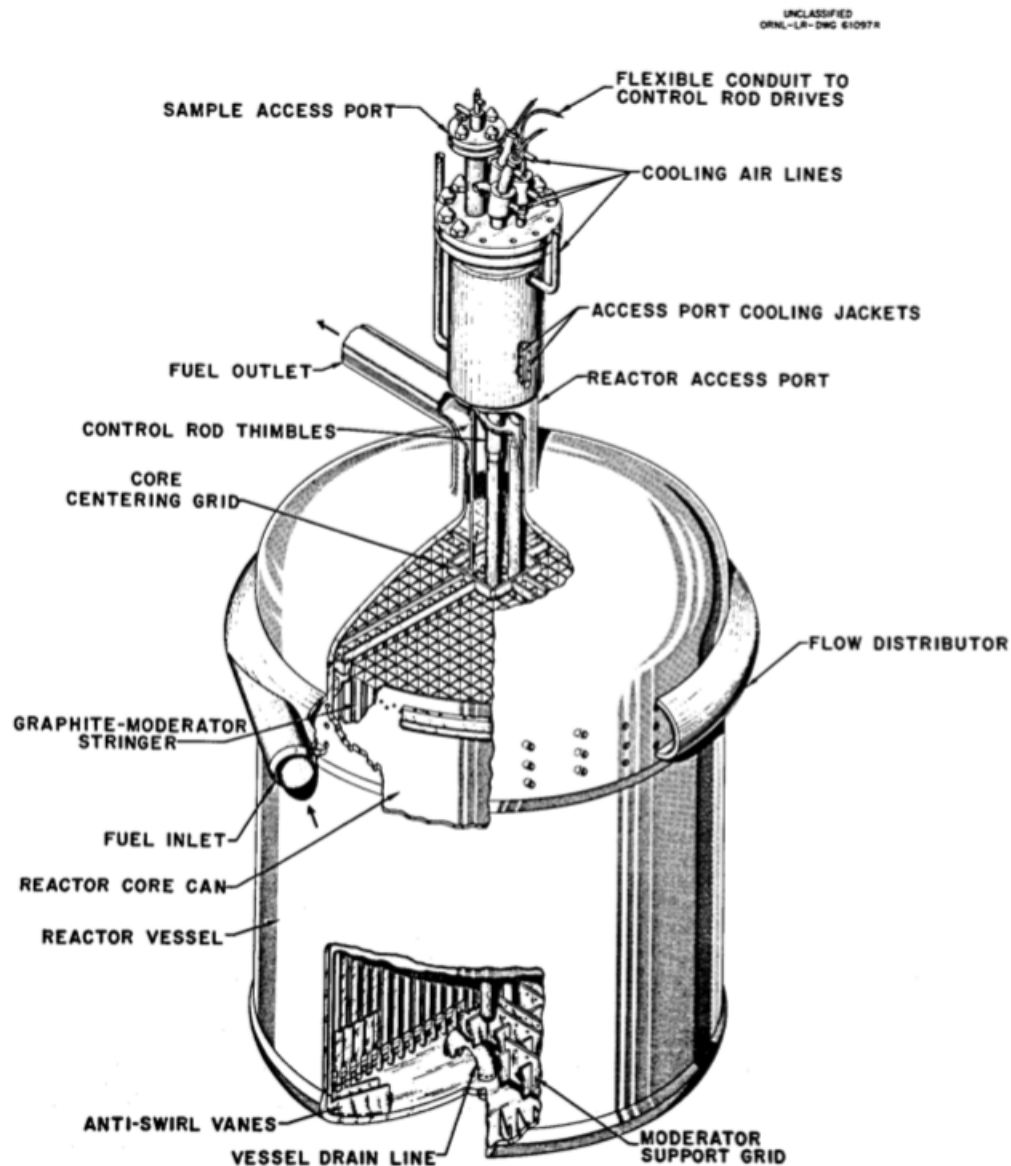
Cutaway drawing of MSRE reactor vessel [30].
